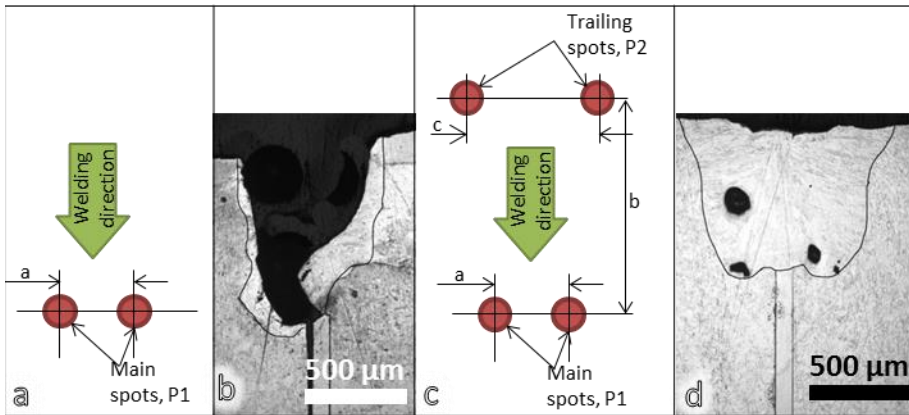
a) Two spot pattern. b) Weld with two spot pattern. c) Four spot pattern. d) Weld with four spot pattern. Both crosssections taken are at the location, where the zinc powder was deposited.
